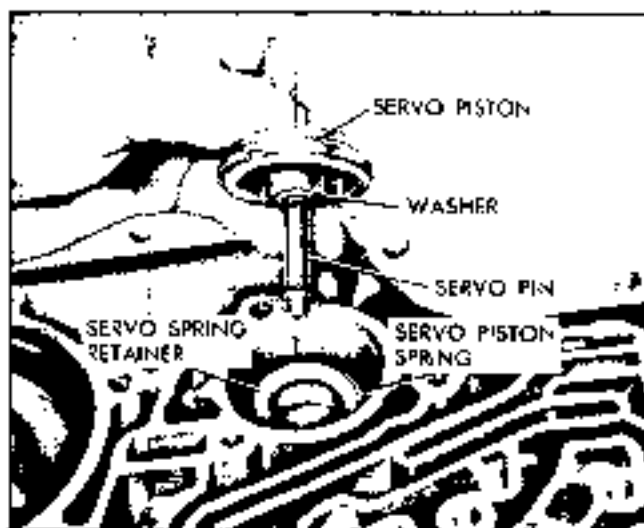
E-156 Assembling Front Servo Piston, Washer and Pin
